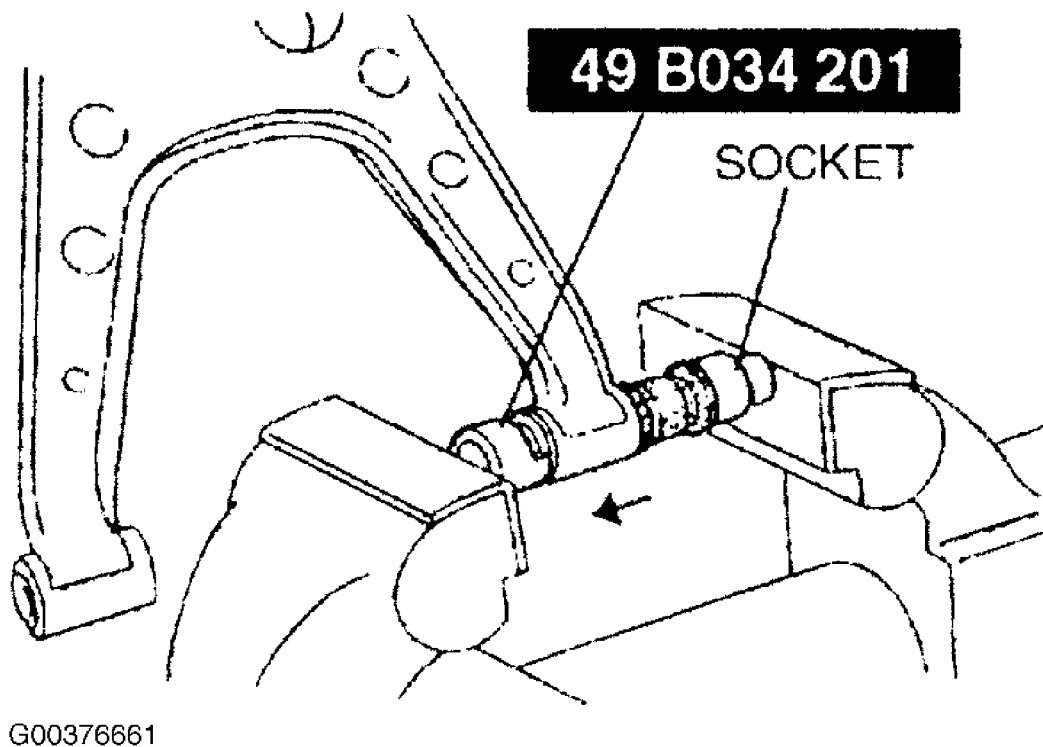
Installing Lower Arm Bushing (Crossmember Side)
